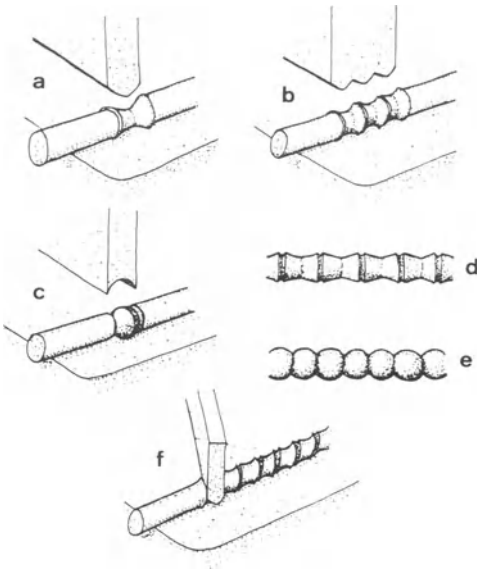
Schematics of spool and beaded wires. a) process using a single edge tool; b) a triple edge tool; c) making a beaded wire with a fluted tool; d) spooled wire; e) beaded wire; f) oblique spooled wire.
